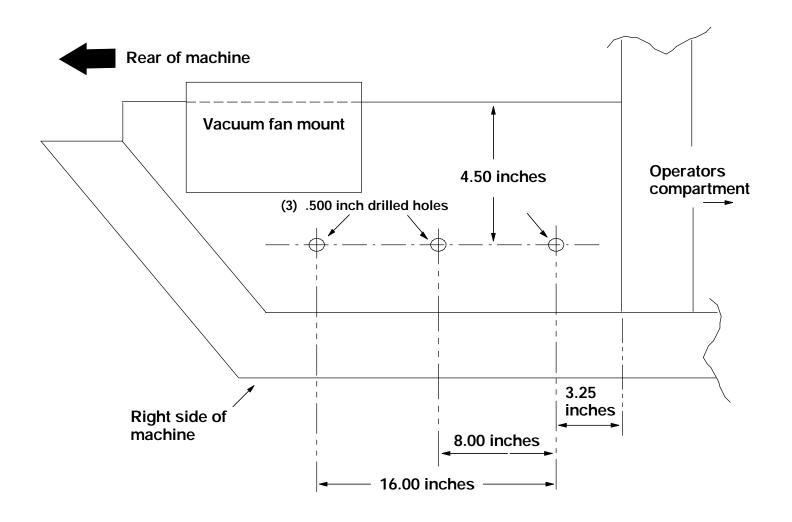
Location Dimensions For Cooler/fan Package Mount Holes
